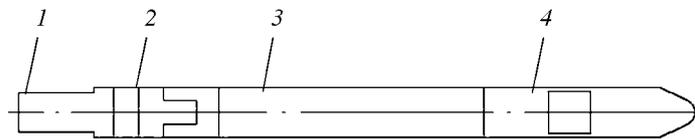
Functional diagram of well unit PP 42-00-00: 1) end piece (for sealed connection to end of cable NK 42-00-00); 2) assembly of sealed electrodes of magnetostrictor magnet wires; 3) emitter assembly, consisting of a waveguide and two magnetostrictors; 4) piston compensator assembly.
